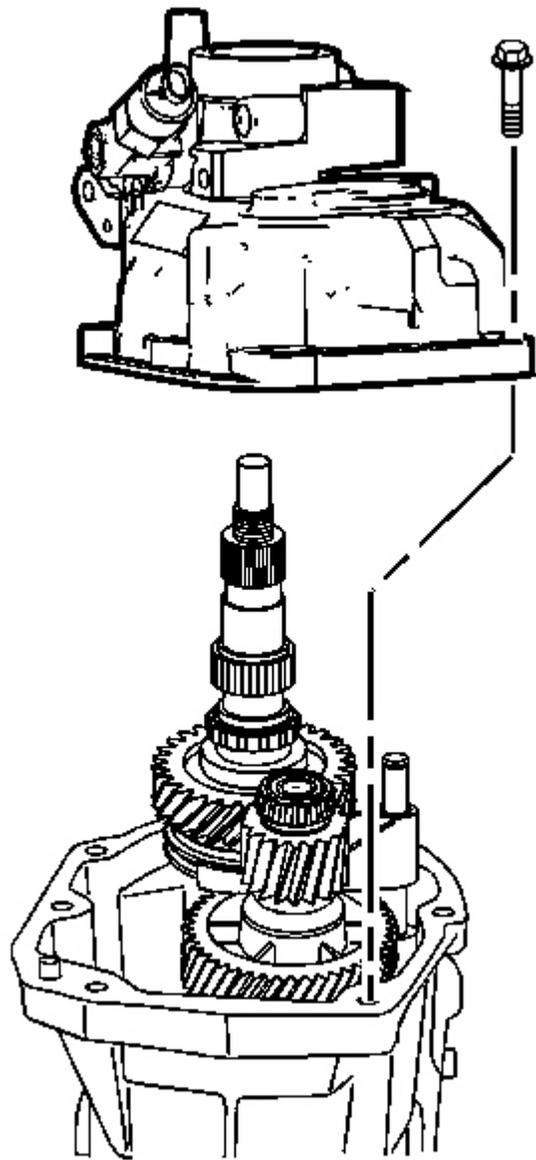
View Of Rear Extension Housing Bolts & Rear Extension Housing
